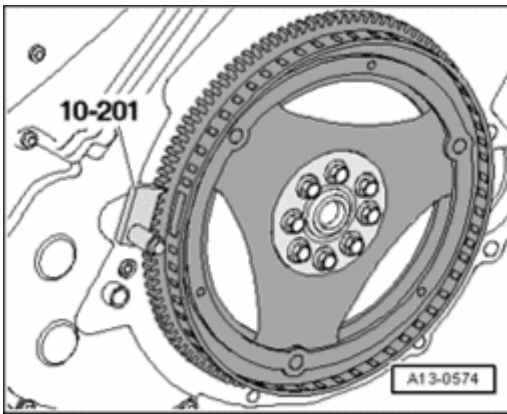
Inserting Counter Hold Tool 10-201 To Loosen Bolts
